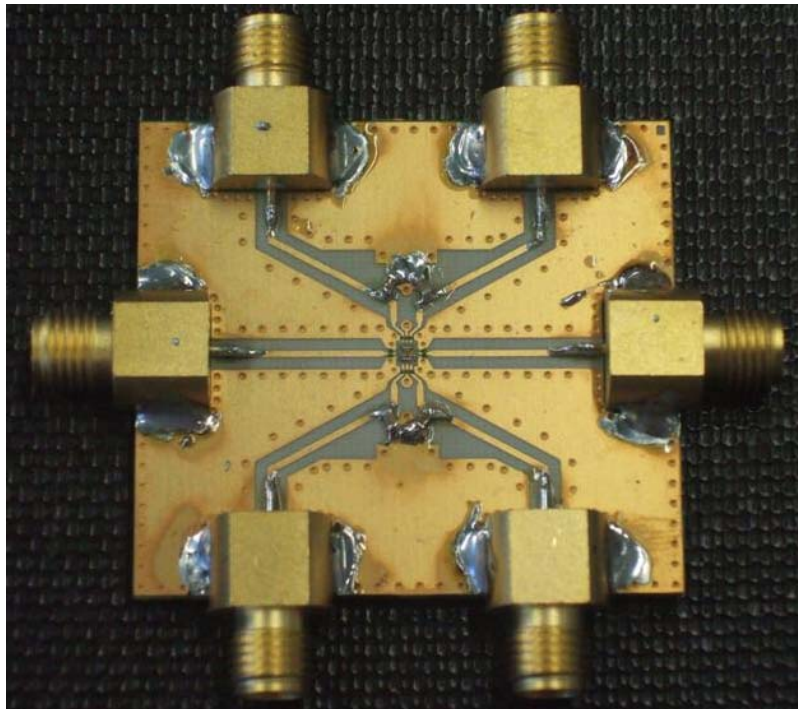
PCB testboard with SMA connectors and 4 SMD capacitors.
